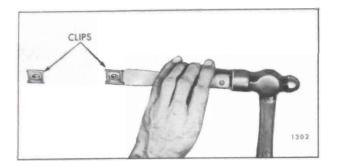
Removal of Bath-Tub Type Molding Clip
